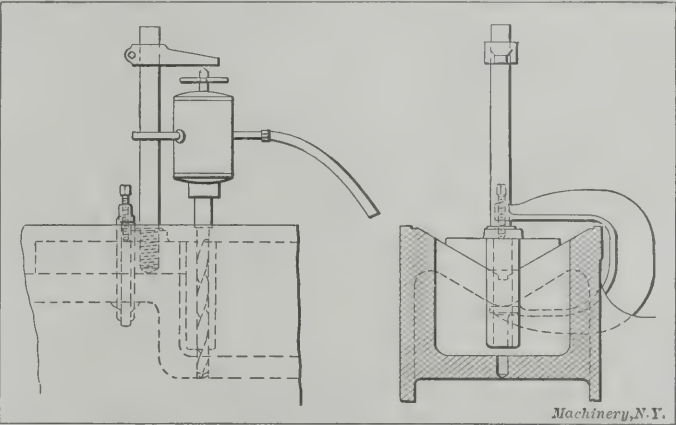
Combination Drill Jig and "Old Man" for Drilling Hole in Oil Pockets for Oiling Device. Jig insures Hole being drilled in Center of Way
